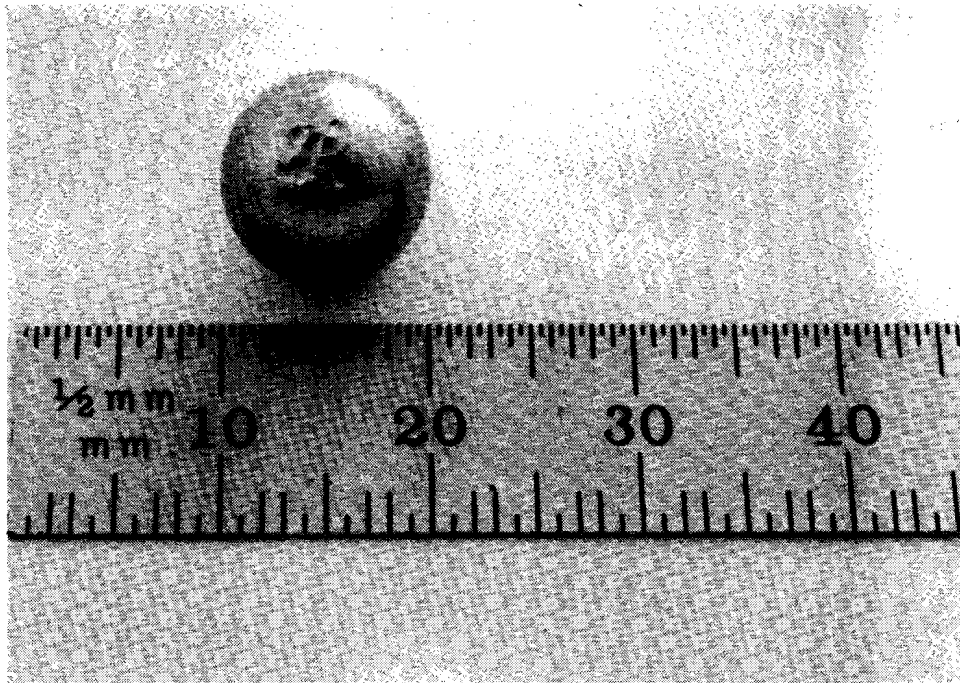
90-Degree Gearbox -408 Bearing Ball C/D Fault, Runs 4A + 4B
